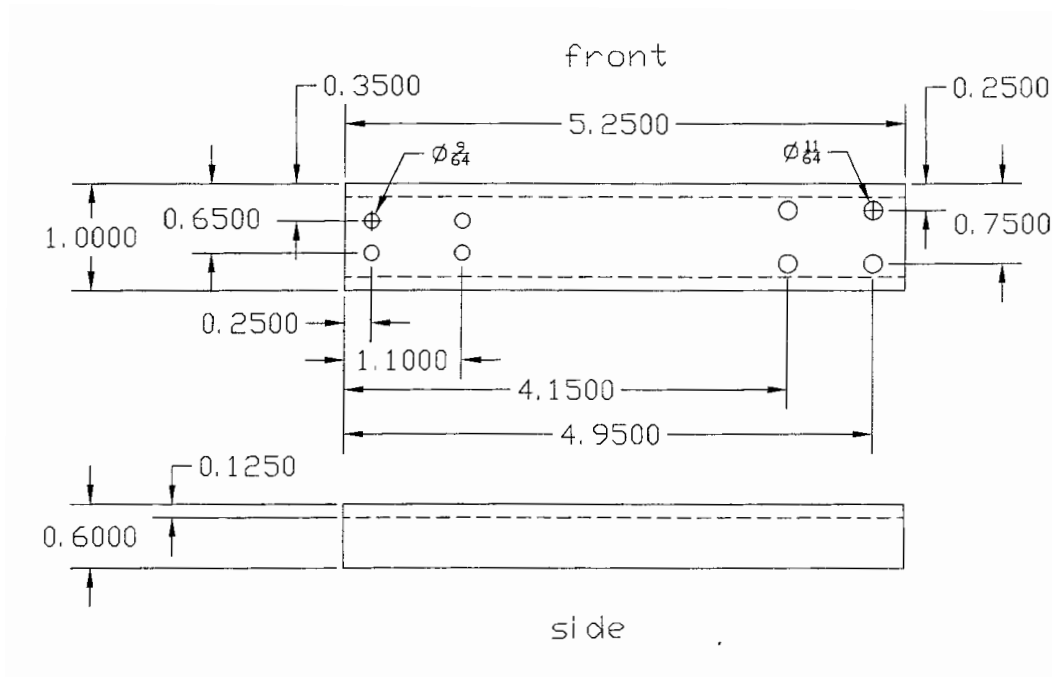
CAD details of the knee plate extensions. They are cut from square aluminum tube.
